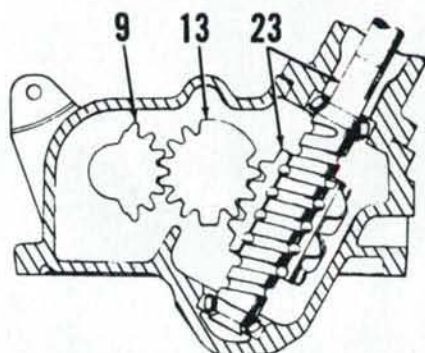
Cross-sectional view of manual steering gear assembly showing correct installation of sector gears and wormshaft assembly. Refer to Fig. 2 for exploded view and parts identification.
